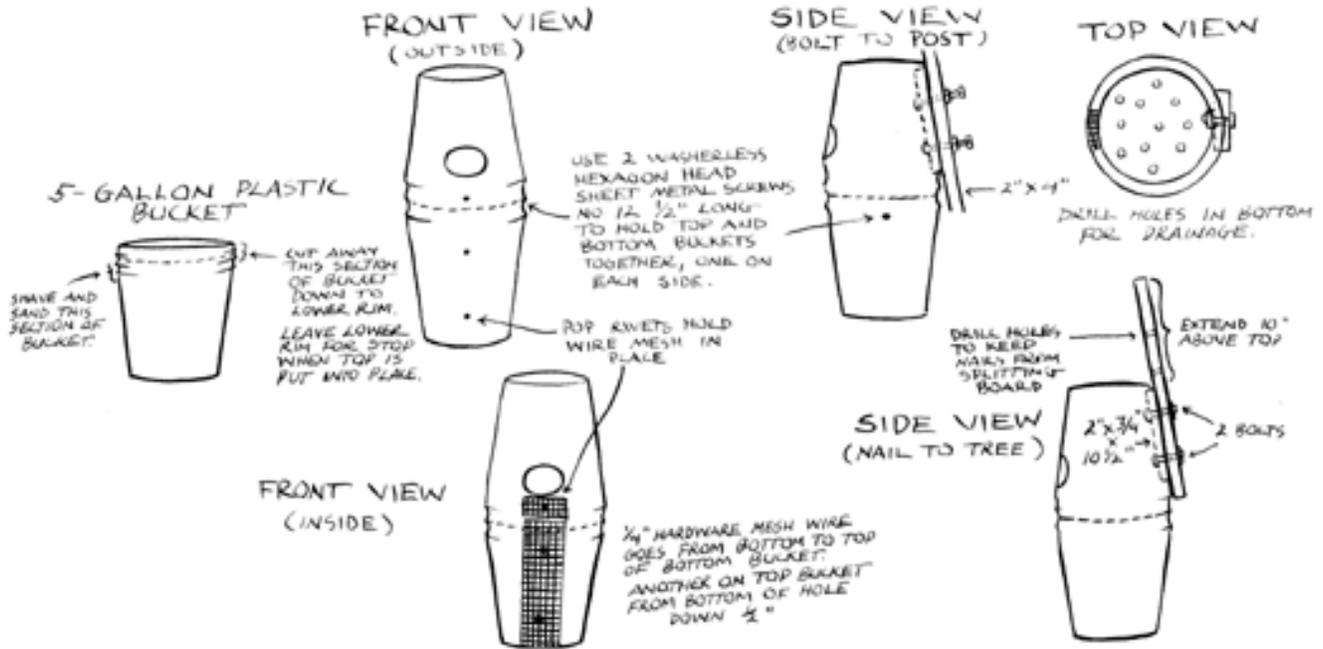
Two plastic pickle buckets can be modified and joined together to make a nest box. A predator guard should be installed to protect each nest (see figure 7).
